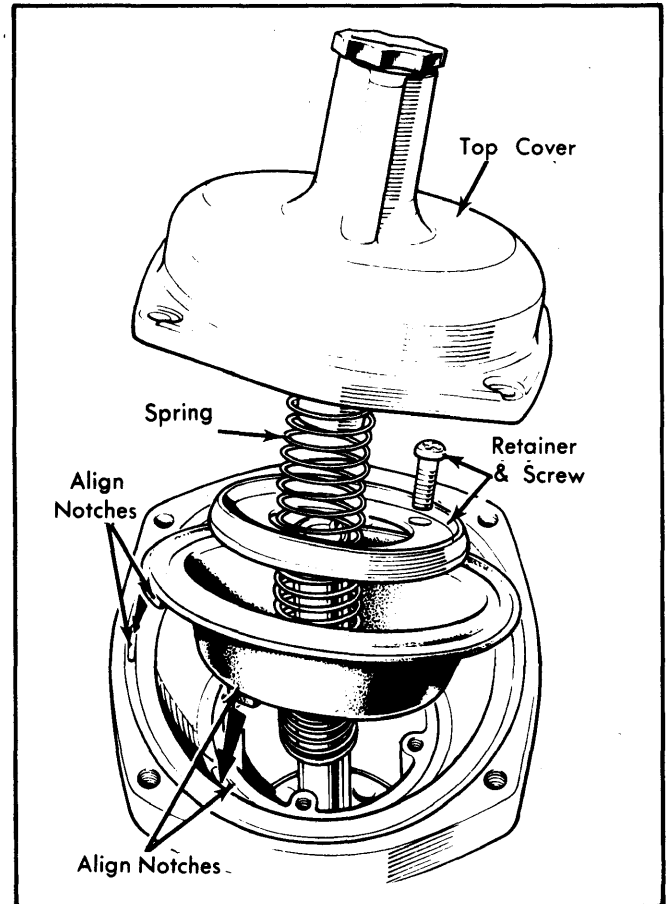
Expanded View of Vacuum Piston and Diaphragm
